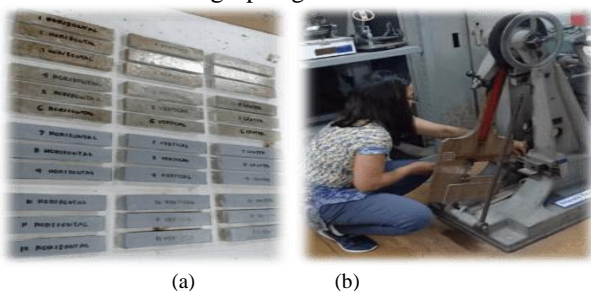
(a) Representative cut sample specimen and (b) Set up of Charpy impact testing
